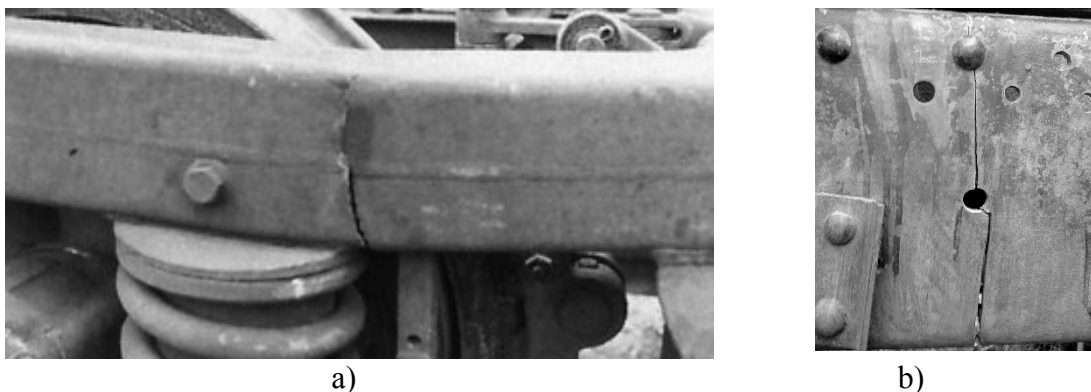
Transverse cracks of bearing structures: a - trolleys, b - truck frames
